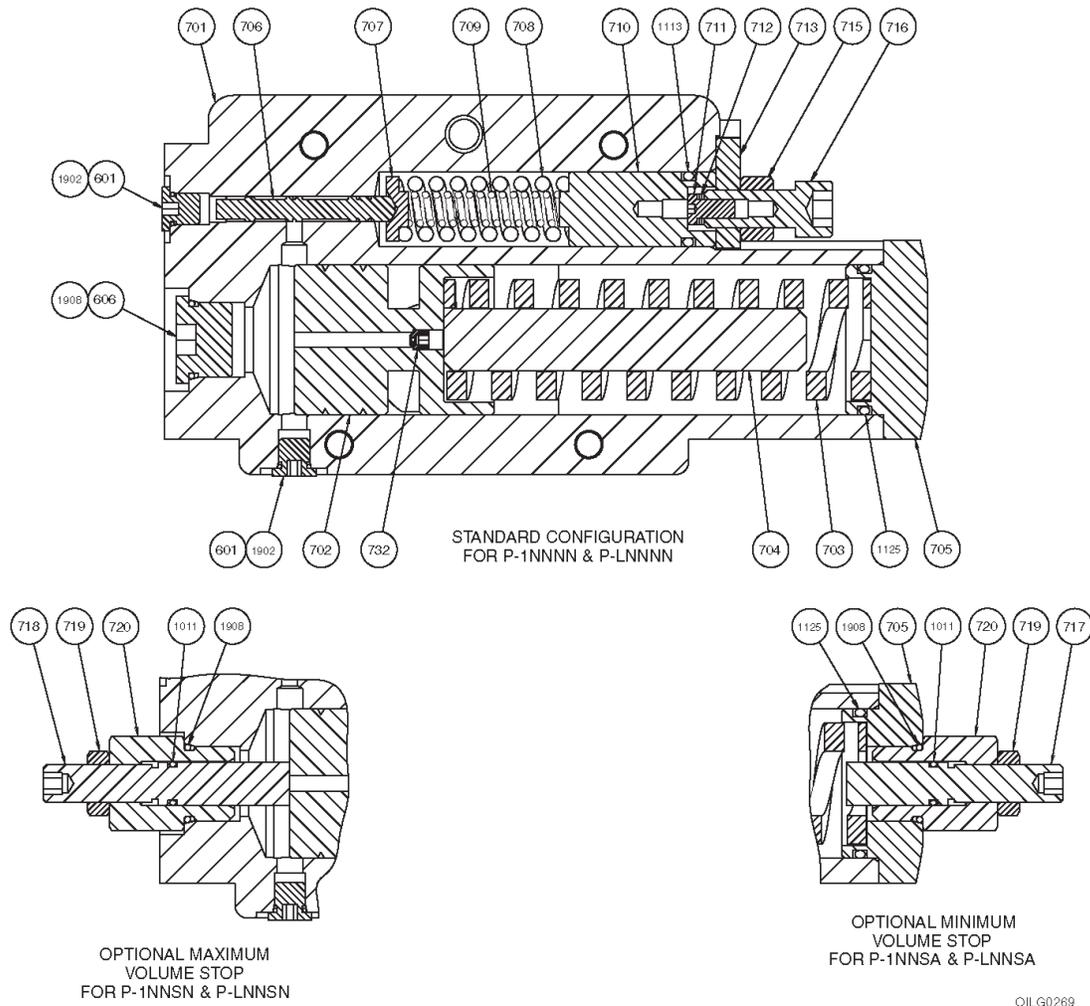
Parts Drawing for "P-1NN" and "P-LNN" Control (519975-201 sheet 1)
